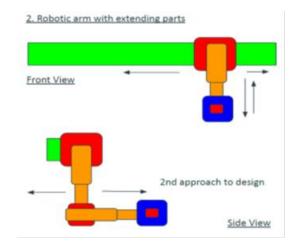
Linear Axis Robotic Arm but with retractable and extendable parts
